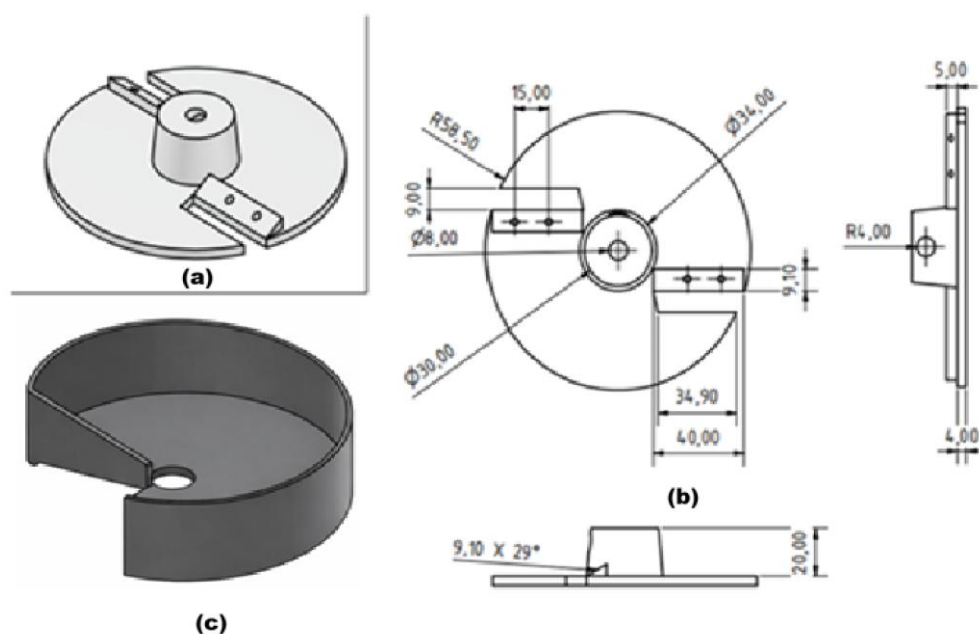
Overall configuration and main components of the portable rotary cutting machine.
